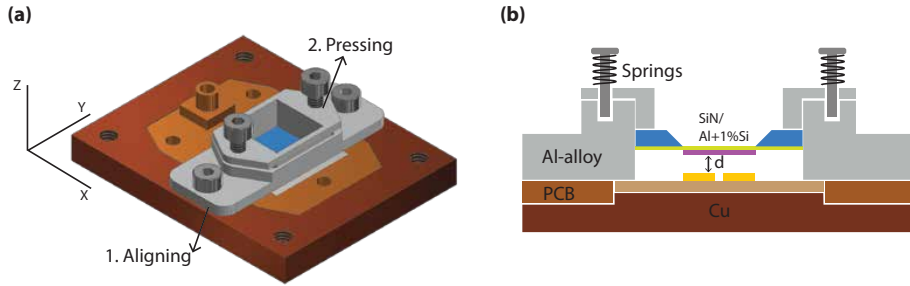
3D Design layout of flipchip tool. (a) flipchip tool used for assembling the electromechanical device. The alignment and clamping are carried out with the tools indicated arrow 1 and 2. (b) 2D Cross-section taken at the middle of the flipchip. By turning the screws, we can change d , hence g_0 .
